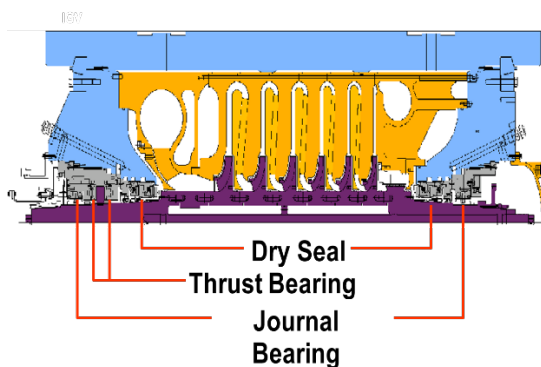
Cross section of a typical modern barrel type compressor with dry gas seals.
